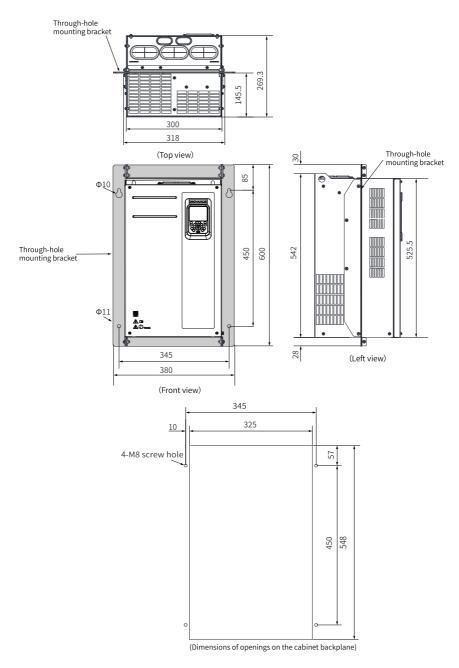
MD500-AZJ-A1T7 through-hole mounting bracket and cut-out dimensions (mm)
